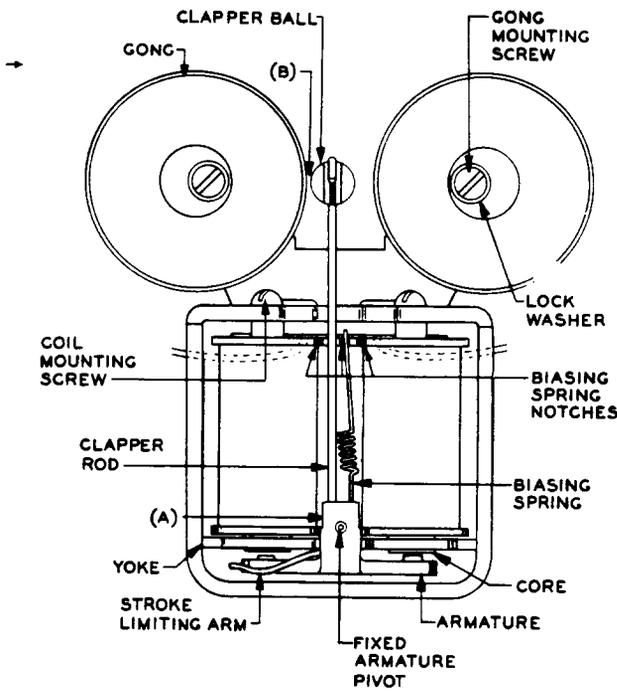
Parts of B-type Ringer Except B3B Ringer
